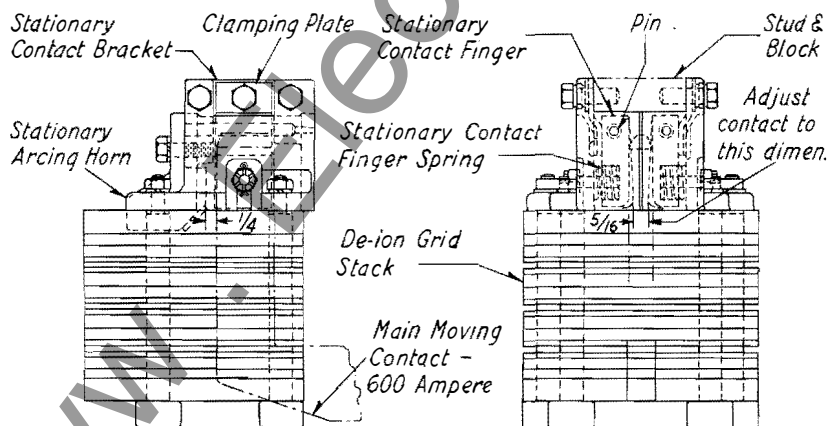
DE-ION GRID AND CONTACT ASSEMBLY 600 AMPERE
